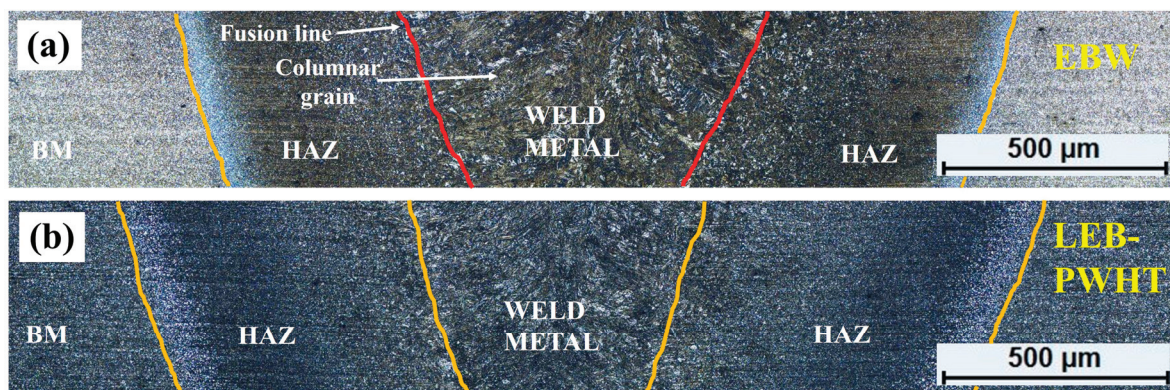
Light optical microscopic panoramic photo of BM, weld metal cross-section, and HAZ: (a) EBW and (b) LEB-PWHT.
